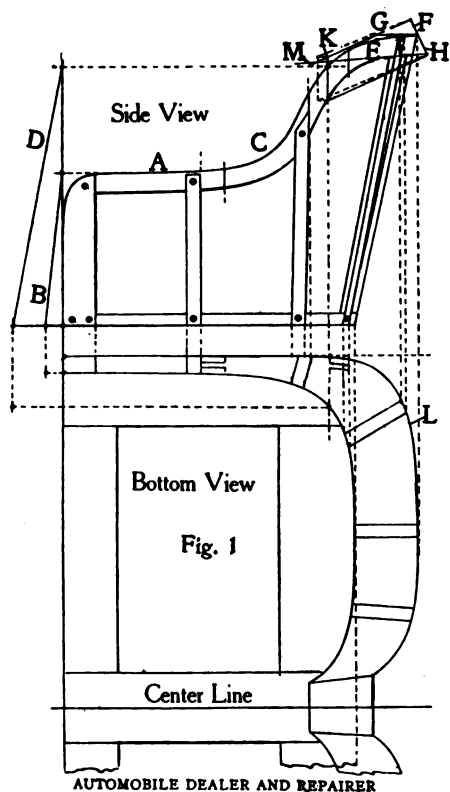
Side and half bottom view of a touring car seat, showing how to lay out and frame the seat rail.
